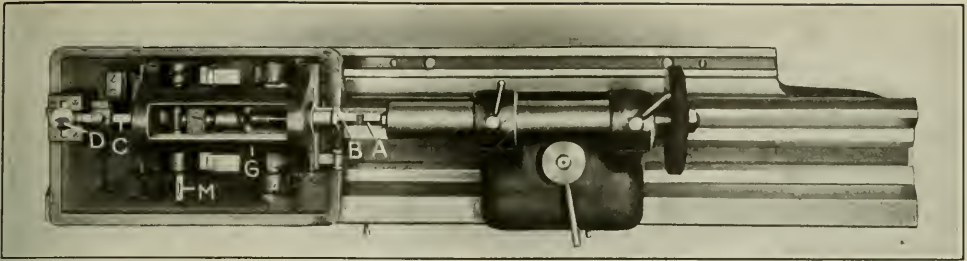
Plan View of Comparator used for checking Precision Gage-blocks
